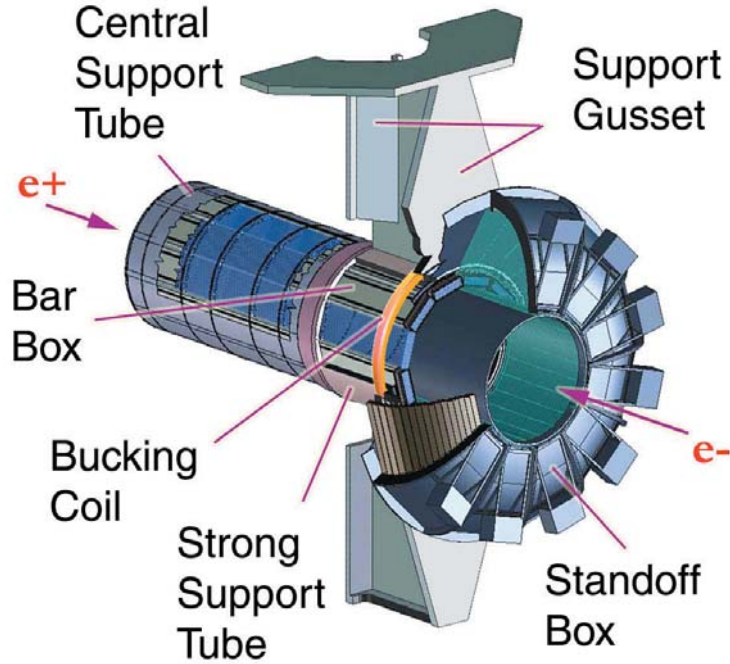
Exploded view of the DIRC mechanical support structure.
